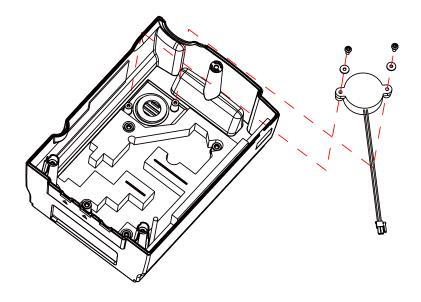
FIGURE S: REMOVAL AND INSTALLATION OF THE BUZZER ASSEMBLY
